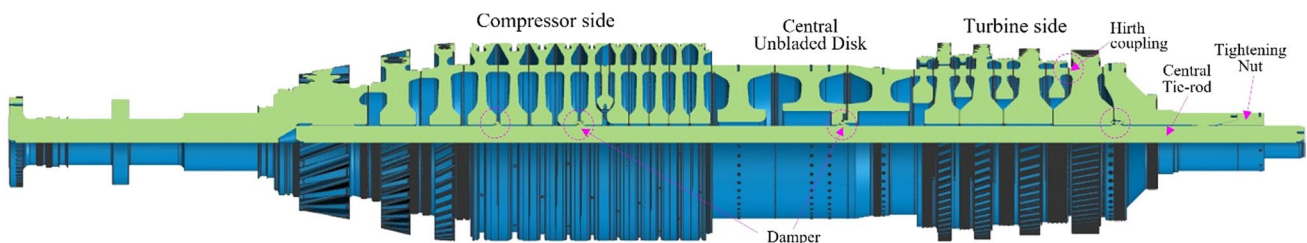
Cutaway view of DGT-300H gas turbine rotor
